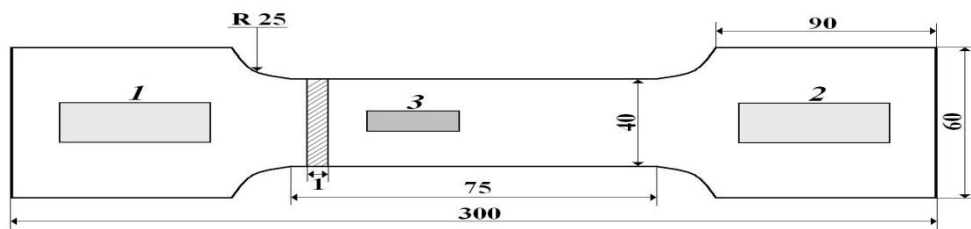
Shape and geometrical dimensions of the Aluminum Alloy Sample.
